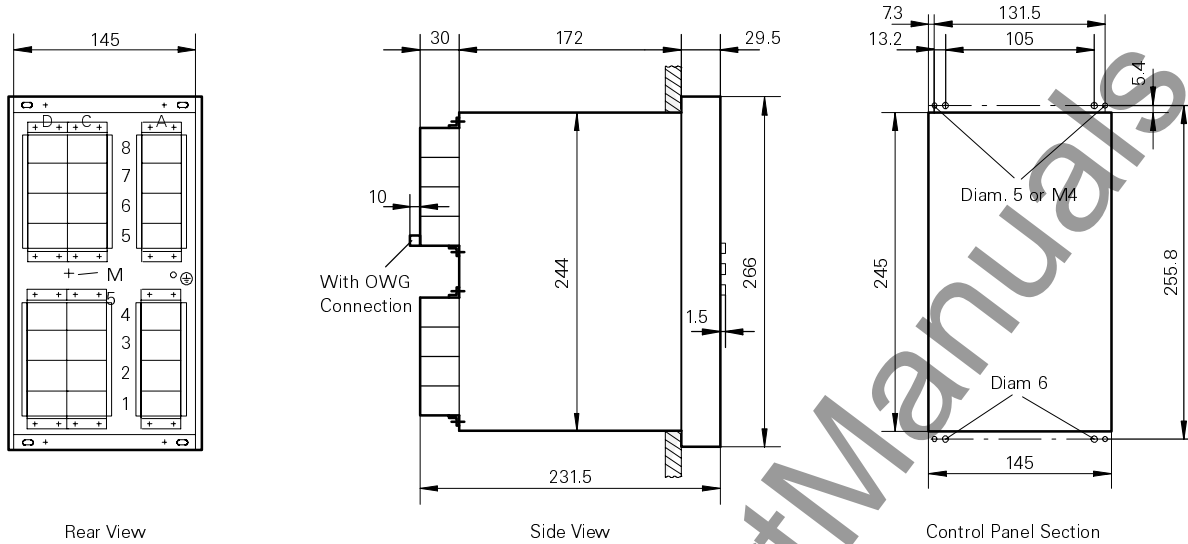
Dimensional Drawing of 7XP2030-2 for Panel Flush Mounting or for Cubicle Installation, Device Version 7SA518 (all dimensions in mm)
